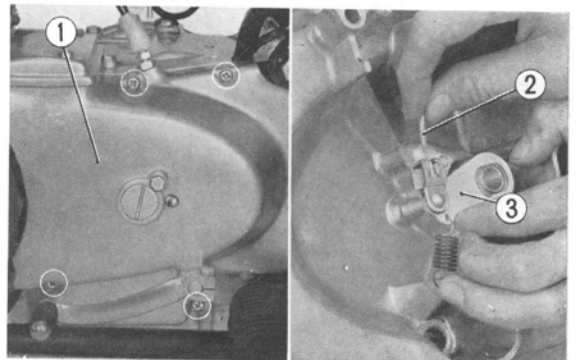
① Left crankcase cover ② Clutch cable ③ Clutch lifter
